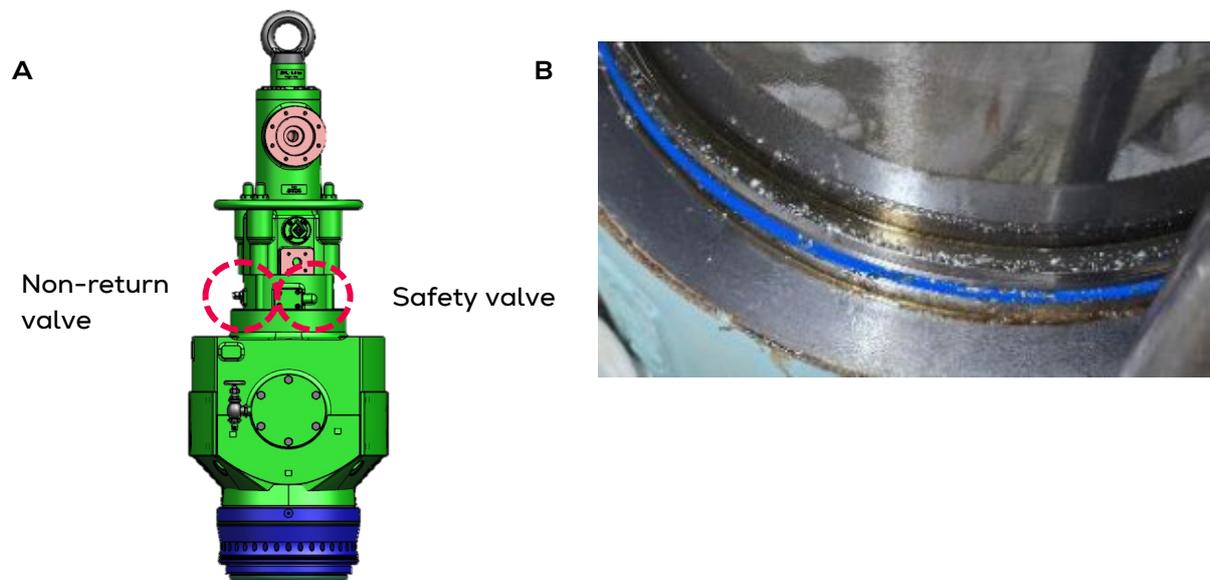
a) Non-return valve and safety valve and b) Mating area between oil and air cylinders
